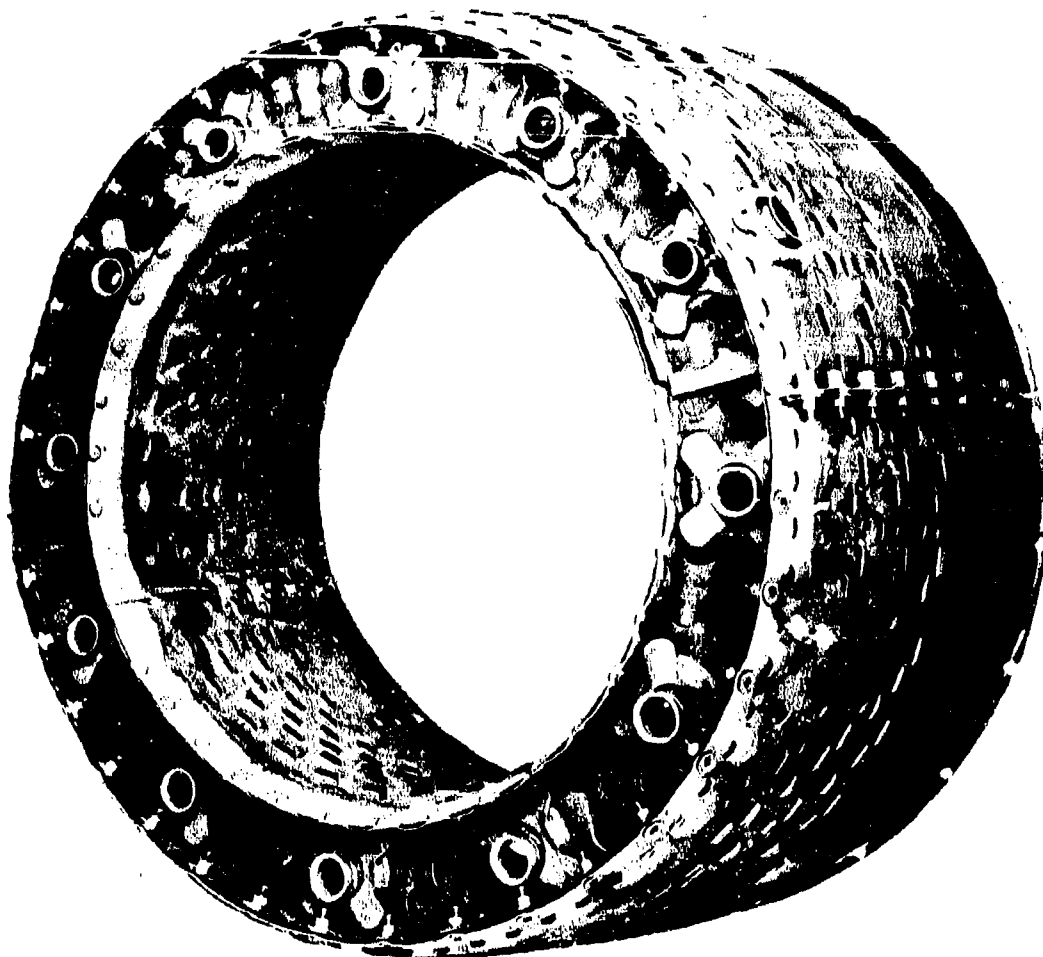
T64 TAKE-APART COMBUSTION LINER
